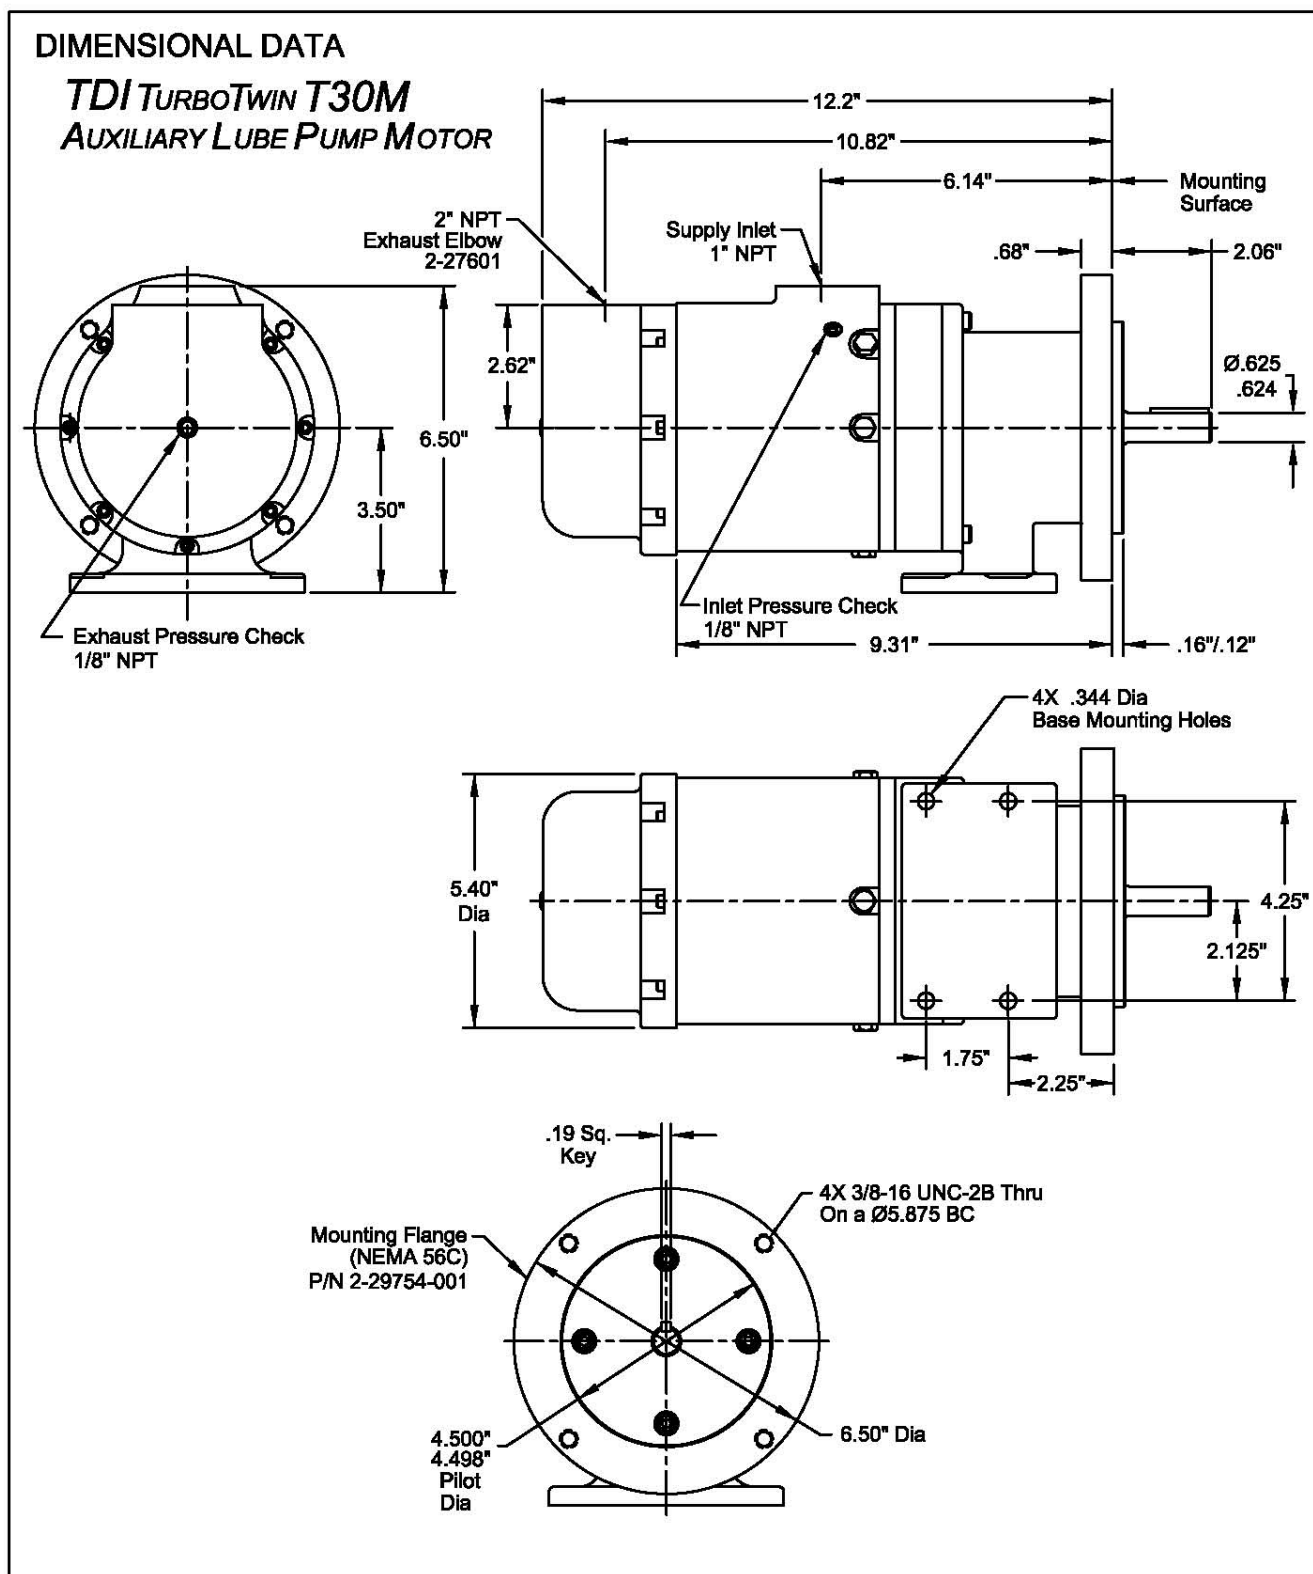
T30-M Lube Pump Motor w/NEMA 56C Mounting Flange
